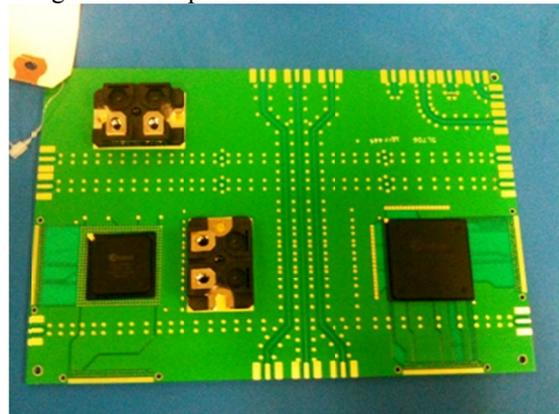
PCB test structure in fabrication. All versions of the PCB materials have the same layout, for comparison. This image shows the daisy-chain FPGA packages for BGA testing.
